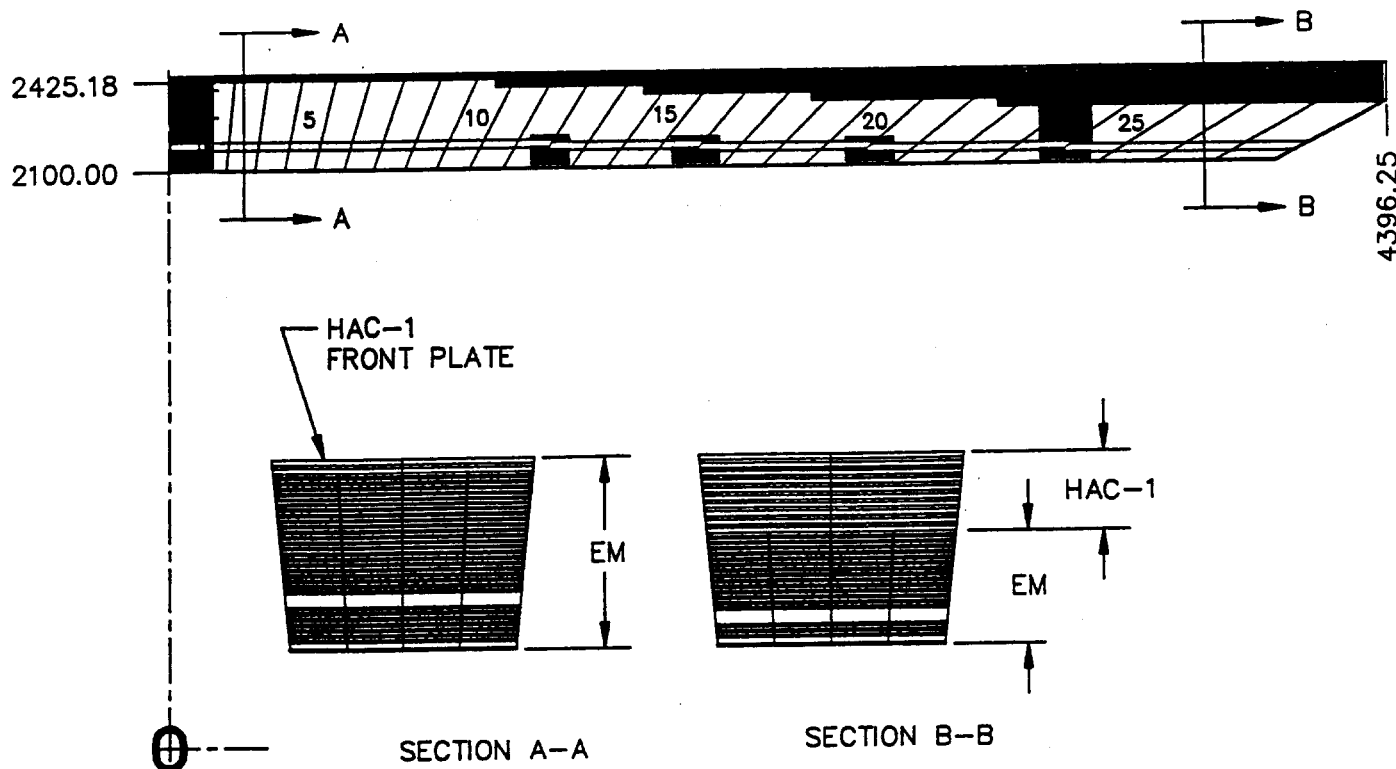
Barrel calorimeter EM section. Tower boundaries are structural steel bulkheads.
